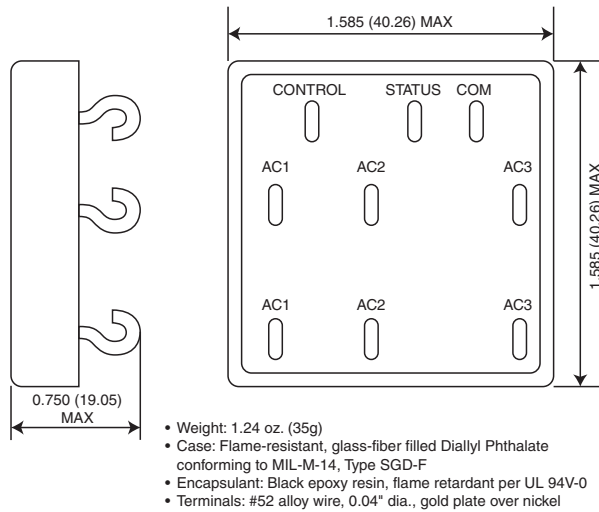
3PAK220 mechanical specification; dimensions in inches (mm)
